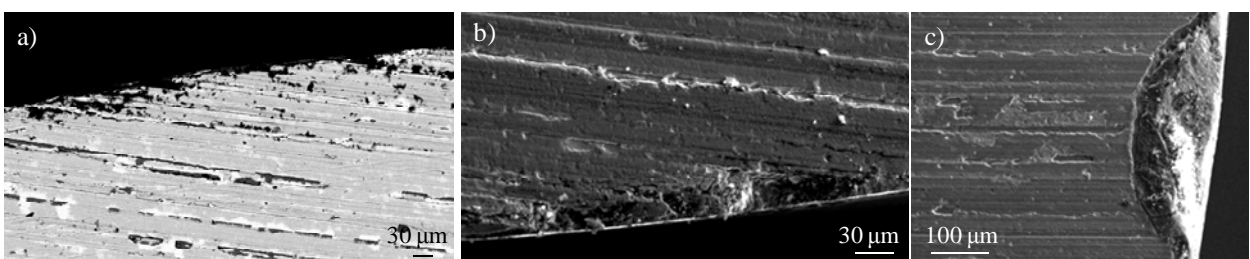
Fractography of the HWS punch coated with W:C-H; rake face after 5000 strokes
